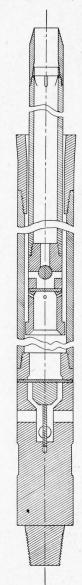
Longitudinal section of a modern cable tool core barrel.
